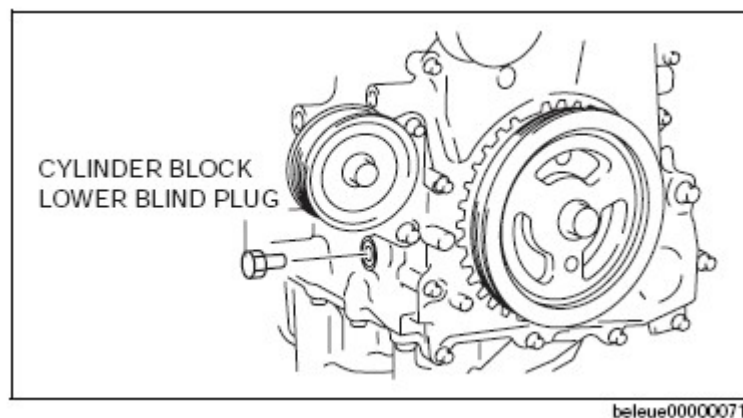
Identifying Cylinder Block Lower Blind Plug
